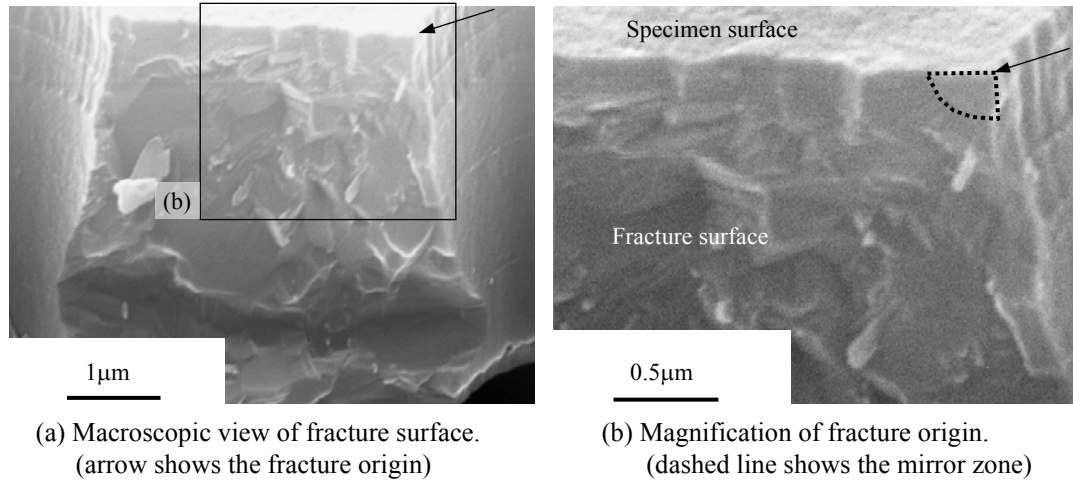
Example of fracture surface ($h = 3.5[\mu m]$, L15R3).
